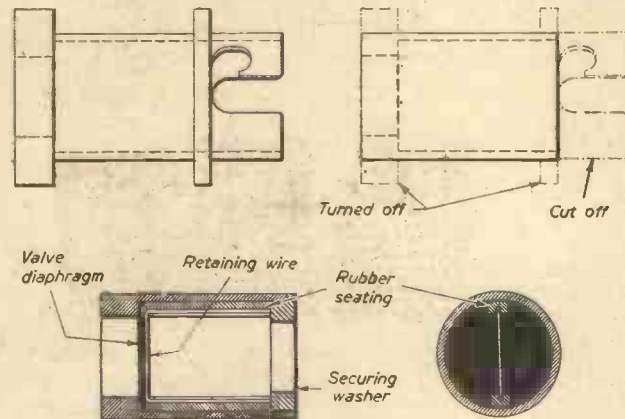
Details of a simple and effective no-return valve for the air exhaust tube.
